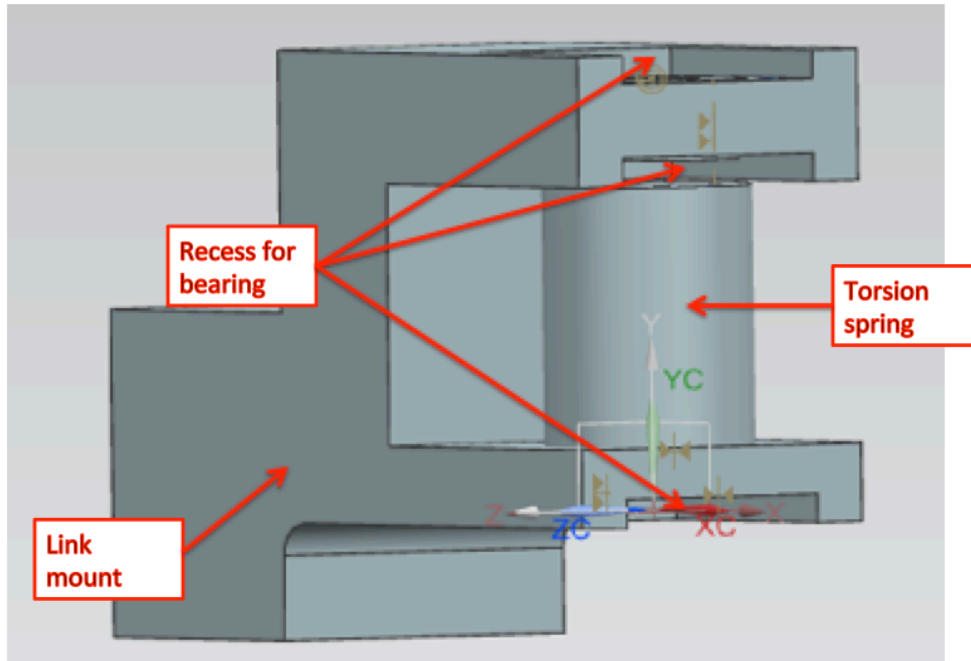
Concept C—Nx Model Front View of Link Mount with Simple Model of Machined Spring Inserted at the Joint
